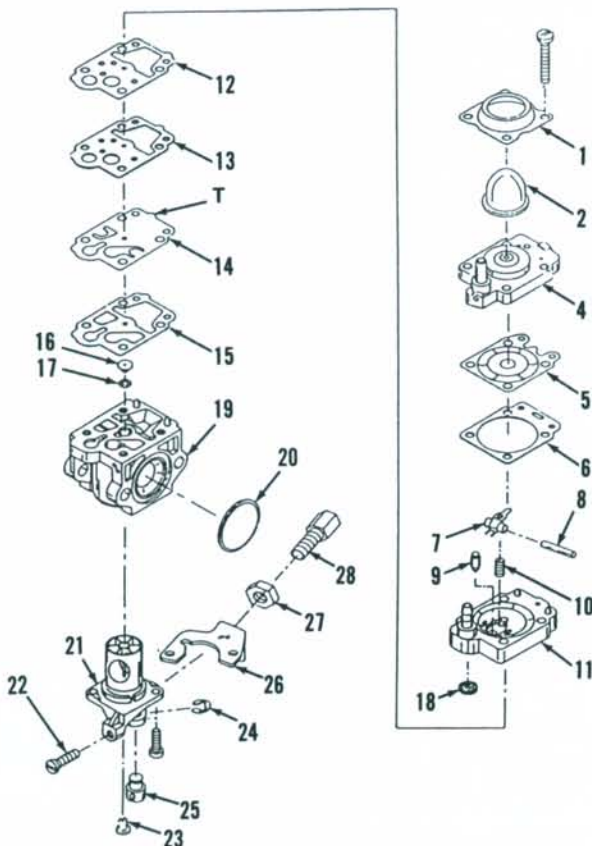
Exploded view of Walbro WYJ. Model WY is similar.
